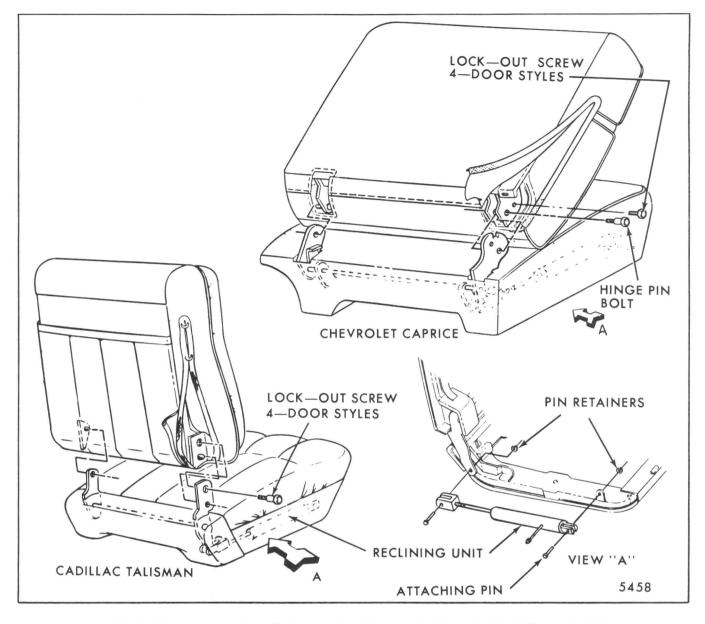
Front Seat Reclining Back Assembly - Chevrolet 50-50 Seat, Cadillac Talisman 40-40 Seat
